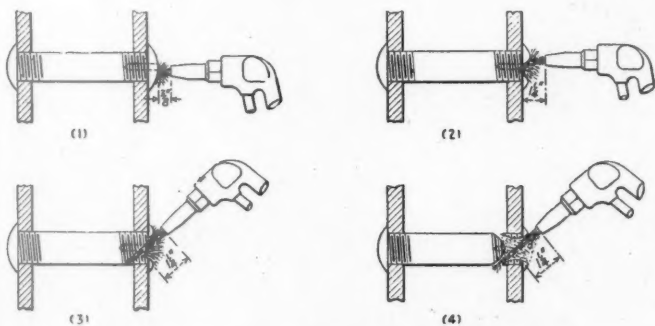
Procedure for removing staybolts by use of the cutting torch
